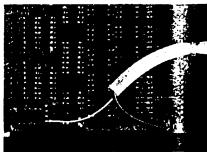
PHONE CABLE connections. Solder the wires directly to the foil side of the board.
